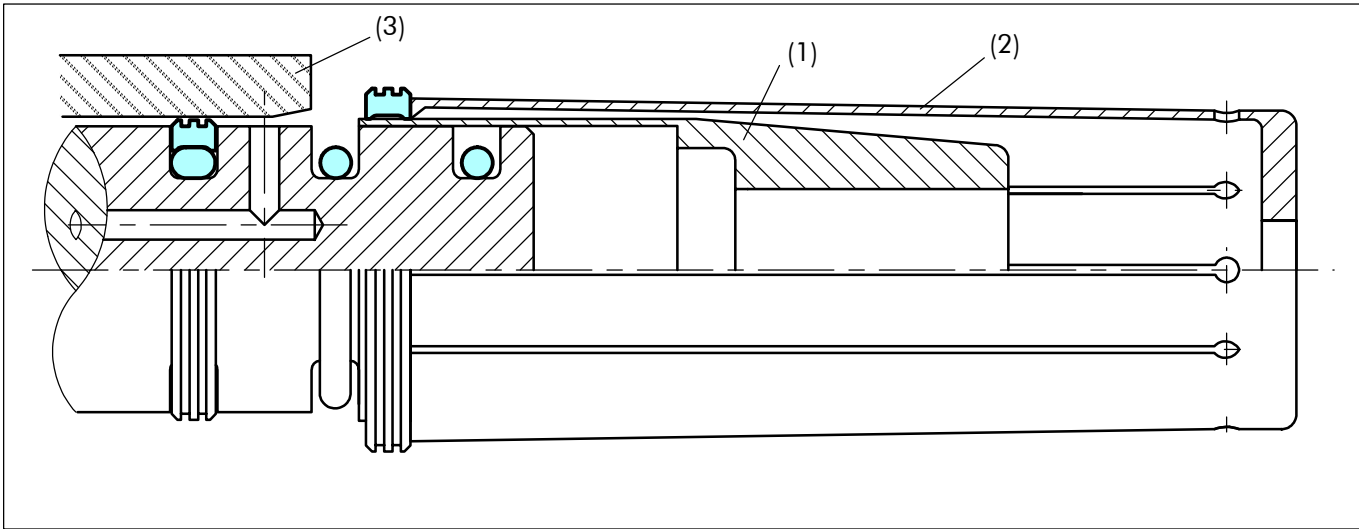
Expanding the Turcon® Roto Glyd Ring® over the installation sleeve using an expanding sleeve
